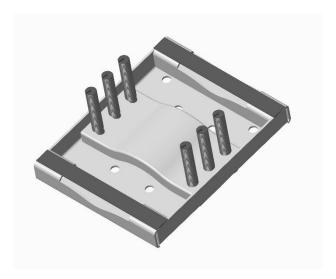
A CAD assembly of the bended sheet metal one-bracket version of Iteration V.
